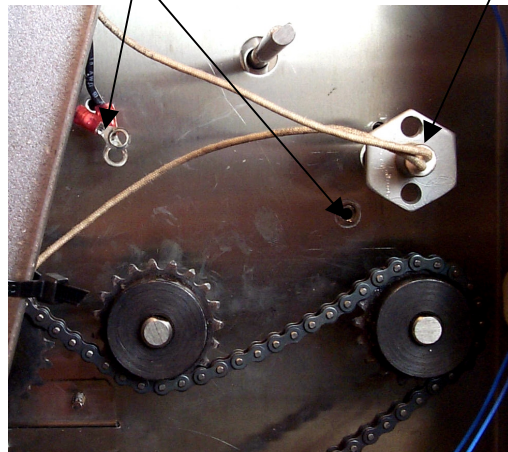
Loosen heater cartridge and slide forward two to three inches. Remove ground screw and conveyor-support screw.
